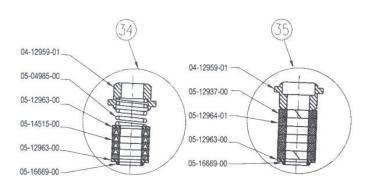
SLIP ON FLANGE ASSEMBLY
